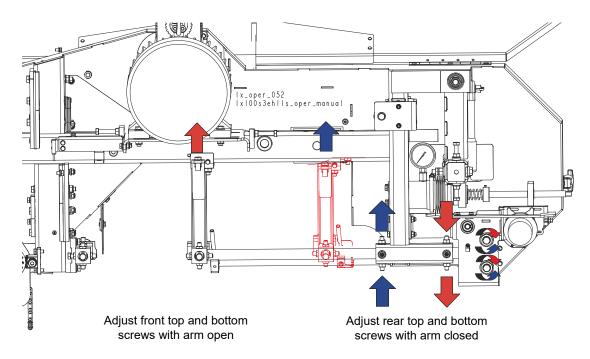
SAWMILL WITH ELECTRIC BLADE GUIDE ARM.
